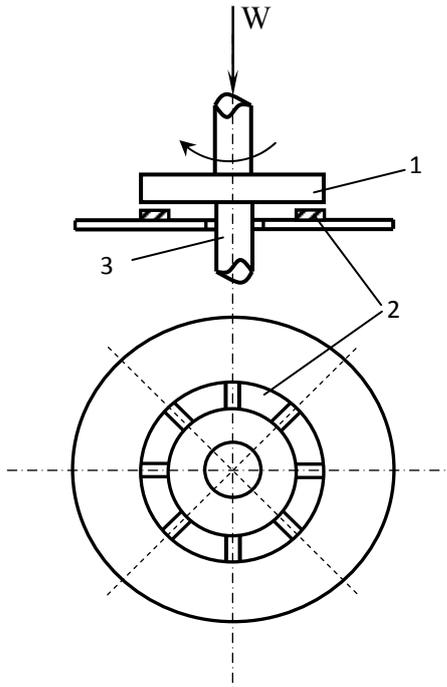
Scheme thrust hydrodynamic bearing: 1 – heel; 2 – blocks; 3 – rotor
